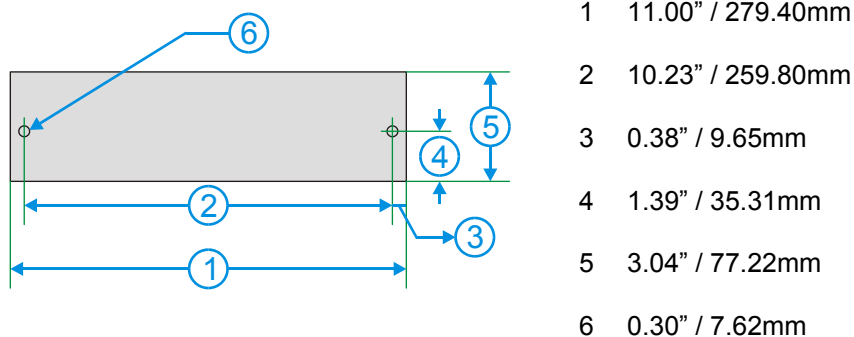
UPS Battery Pack Remote Mounting Dimensions
